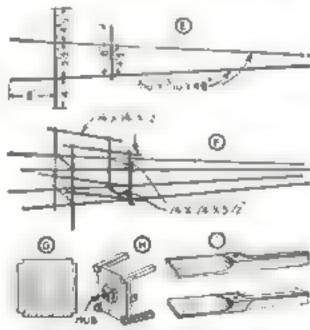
First steps in building a model sirplane kite, and propeller and hab details.
